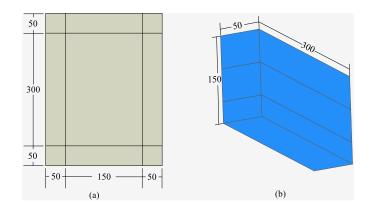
Board part section (a) and board part specimen (b) used for CAD integration.
